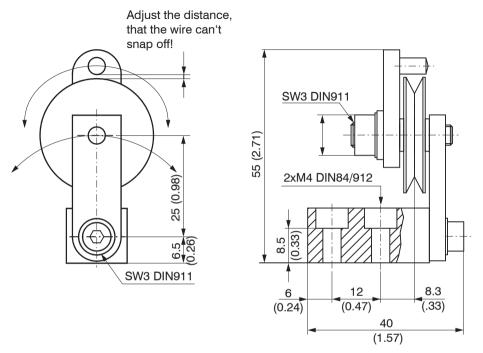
Guide pulley TR1-WDS with mounting socket, dimensions in mm (inches)
